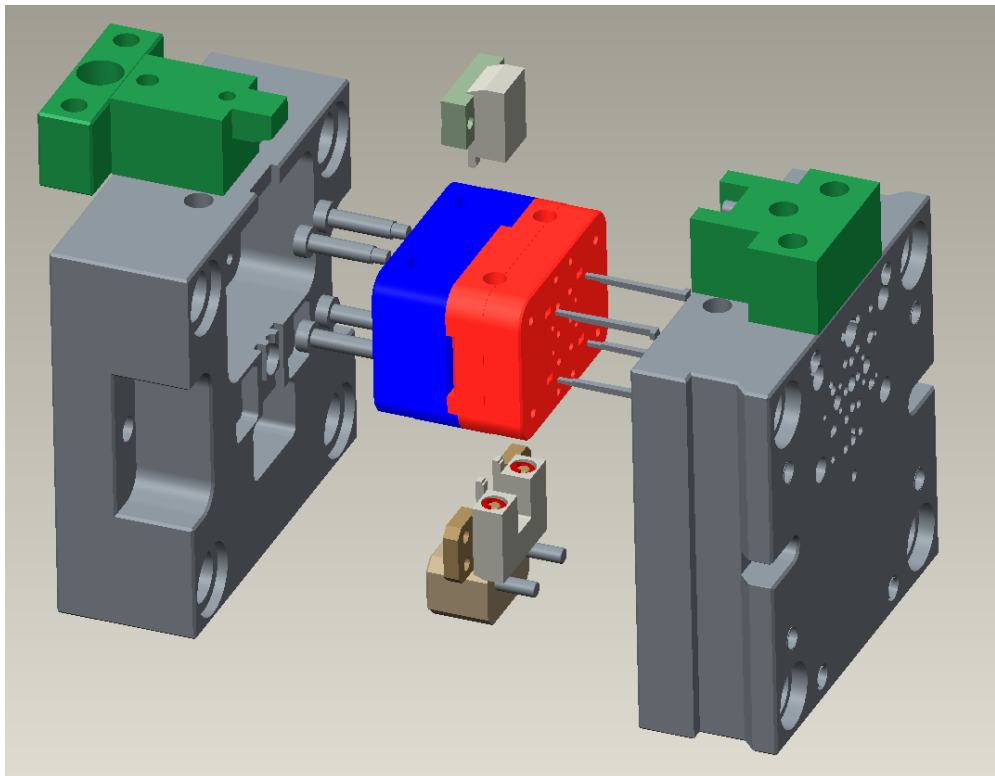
Exploded view of the inserts, sliders and mold platens that were modified for the aluminium inserts.
